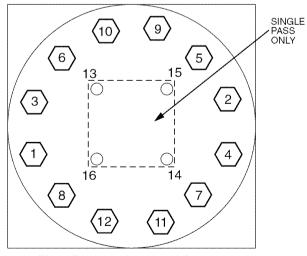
Cooler Head Recommended Bolt Torque Sequence
